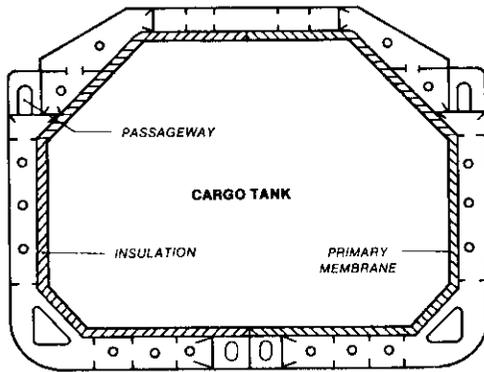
Fig. V. TYPICAL SECTION OF TECHNIGAZ MEMBRANE TANK DESIGN
